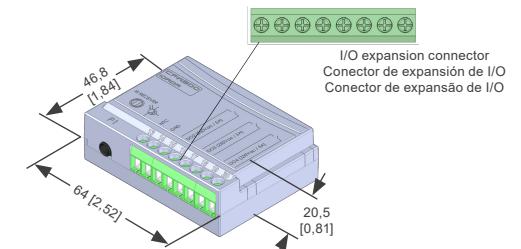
CFW300-IOADR-D dimensions in mm [in] and connectors location
